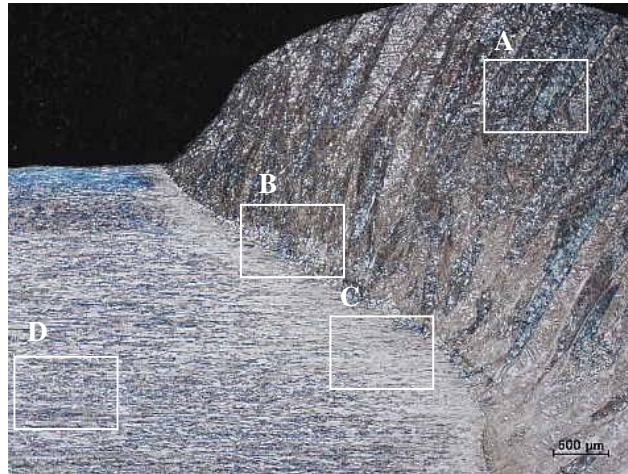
Microstructure of weld joint (S32750, Horizontal position)
